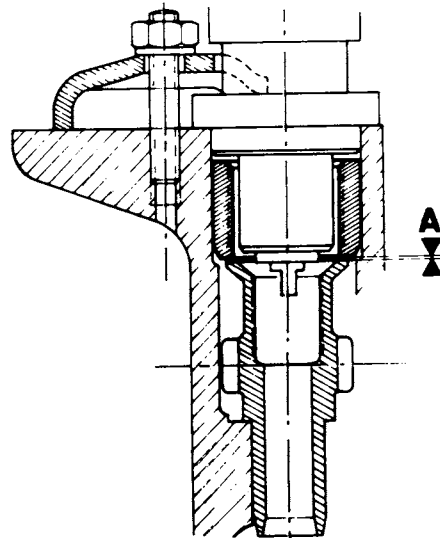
DRIVE GEAR AND SLEEVE CLEARANCE
